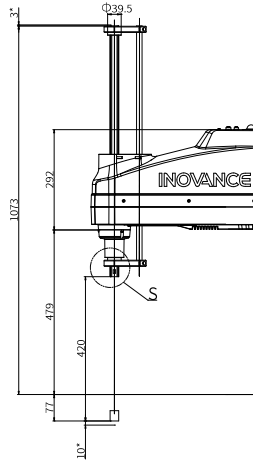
Upper and lower limit position dimensions for axis J3 of IR-GS20 (unit: mm)
